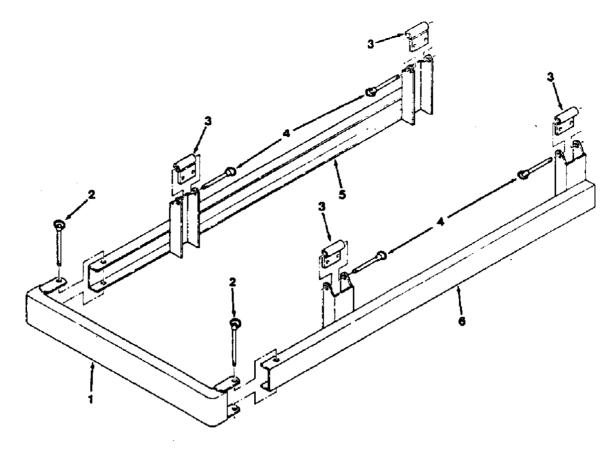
WRAPAROUND BUMPER ASSEMBLY
